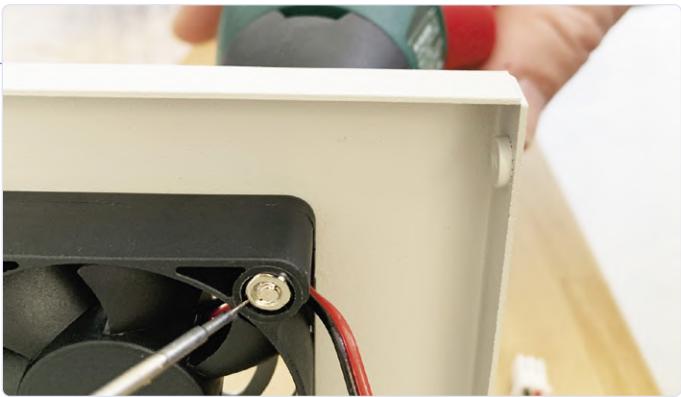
A fine-tipped screwdriver stops the nuts from spinning while tightening.
